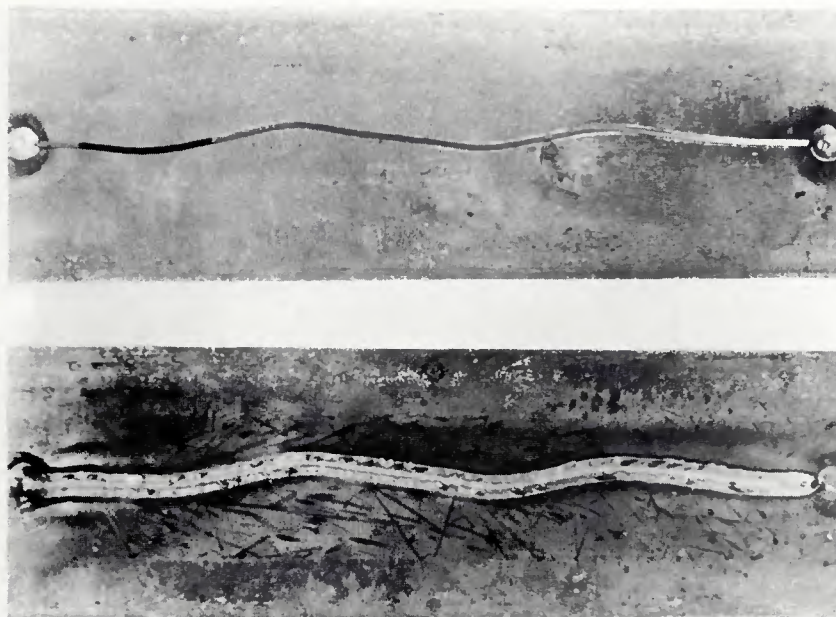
Example of an irregular welding path followed by a GMAW head guided by a mechanically scanned fiber optic thermographic sensor, before (top) and after (bottom) welding
